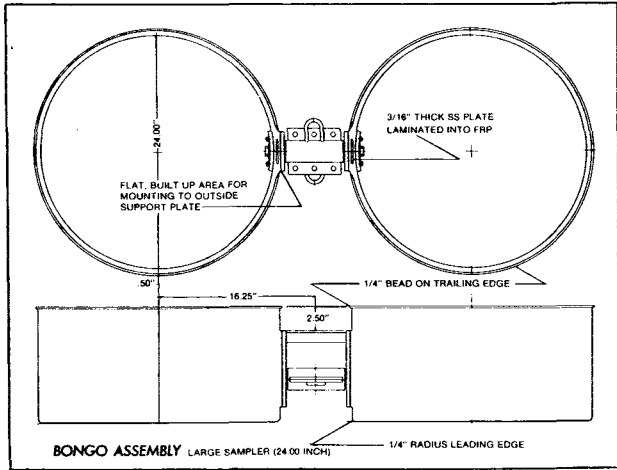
Assembly details of the 61-cm MARMAP bongo sampler.
